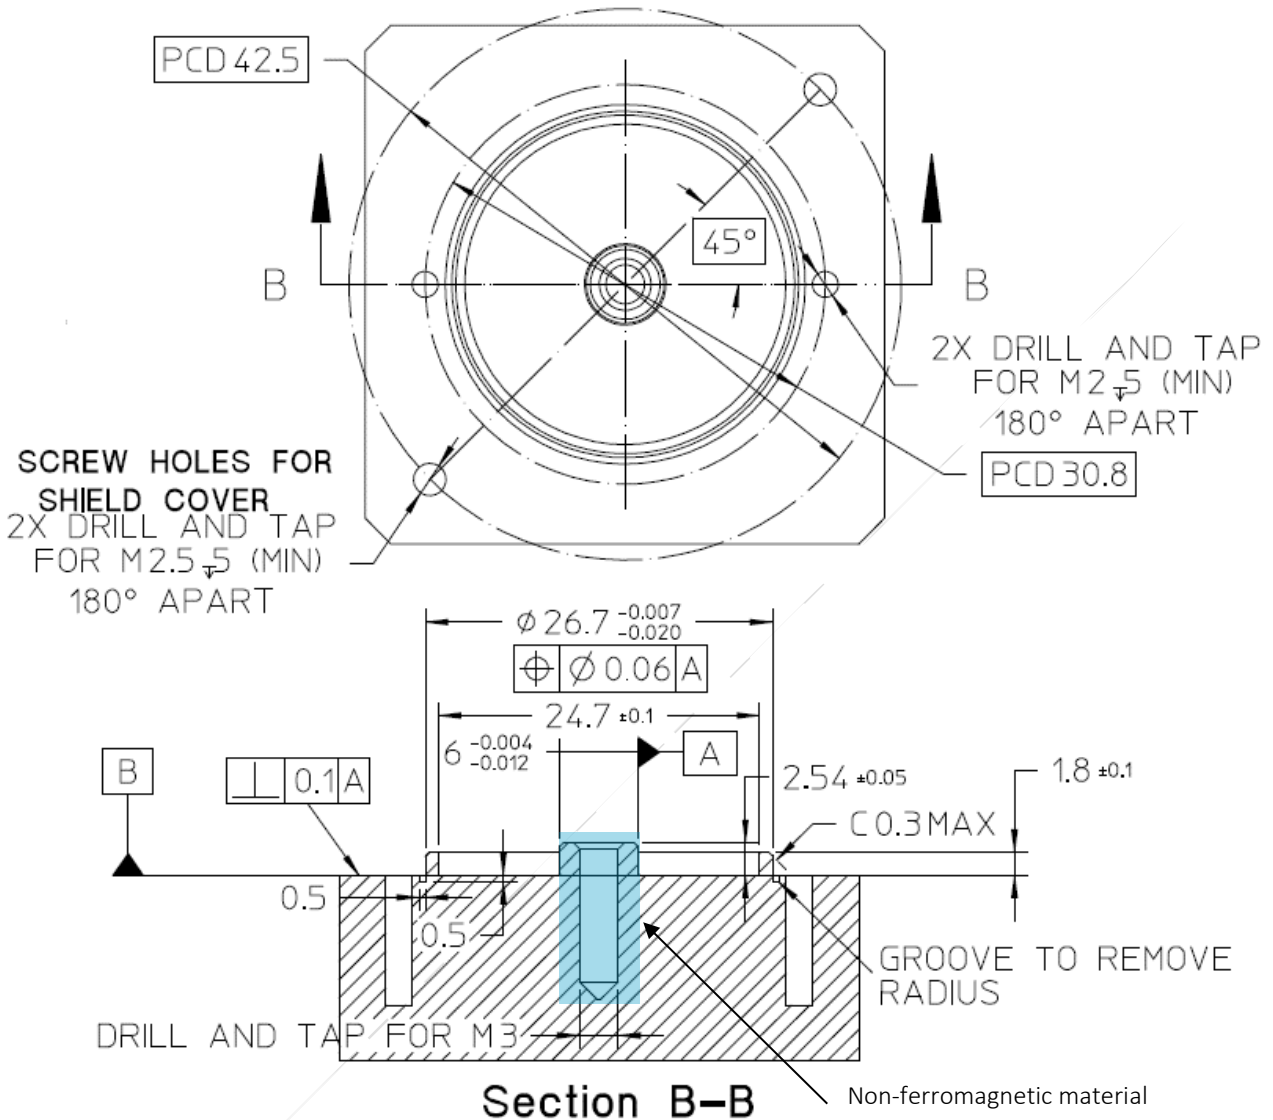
Mounting dimensions when using module outer diameter as the position guide
